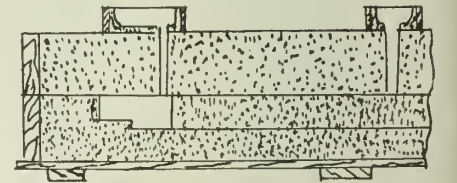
FINISHED MOLD FROM FULL PATTERN.
